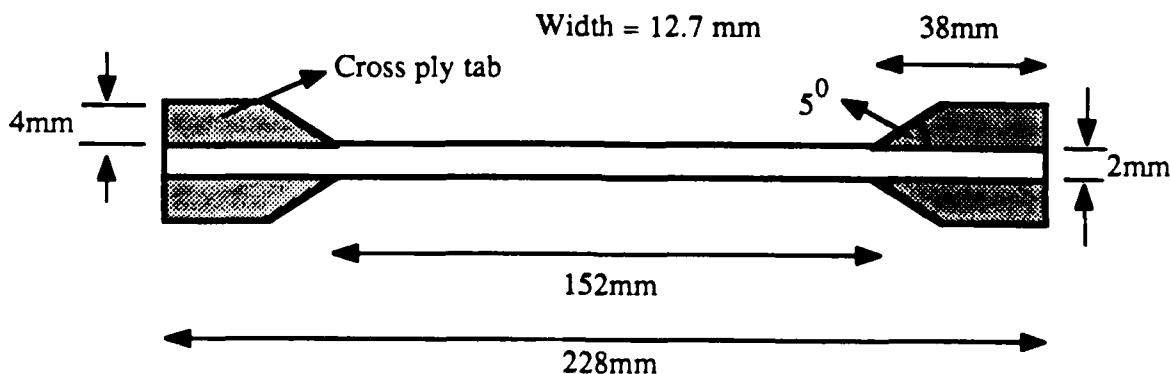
The specimen dimensions recommended by ASTM Standard D3039-74.
